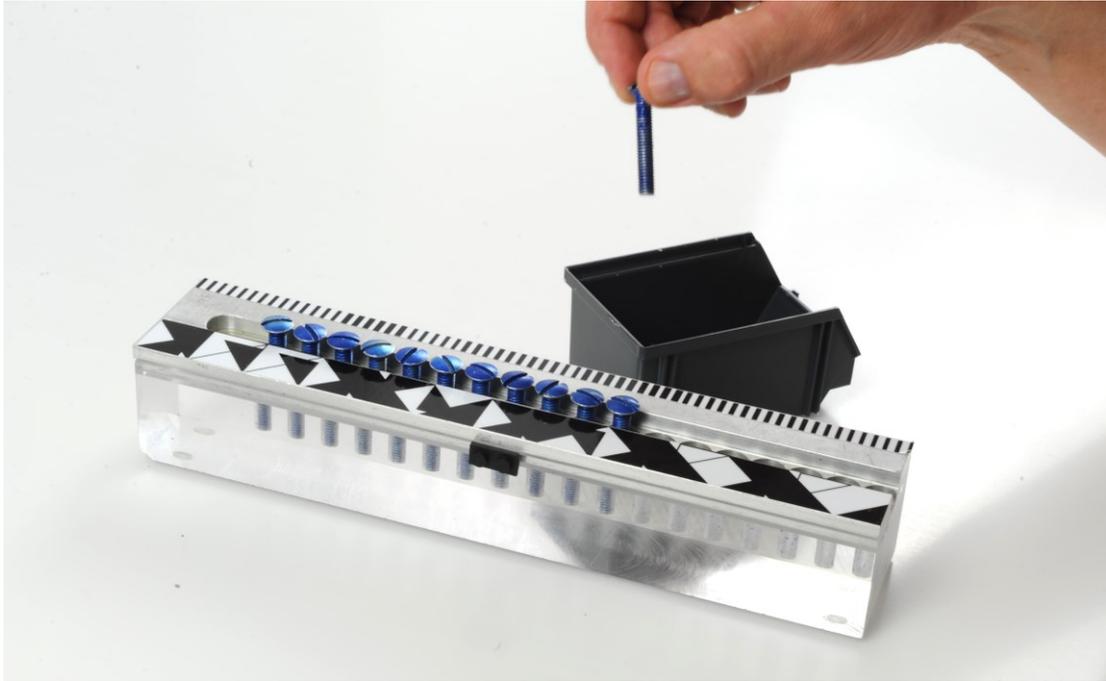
Experimental set-up: Masking rail with marker, screws and container.
